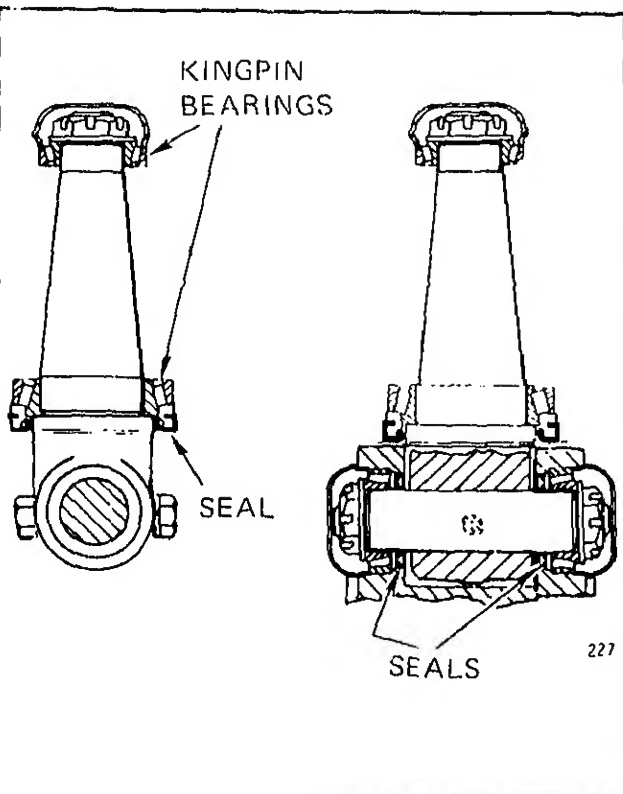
LUBRICATING GUIDE ROLL AXLE BEARINGS.
